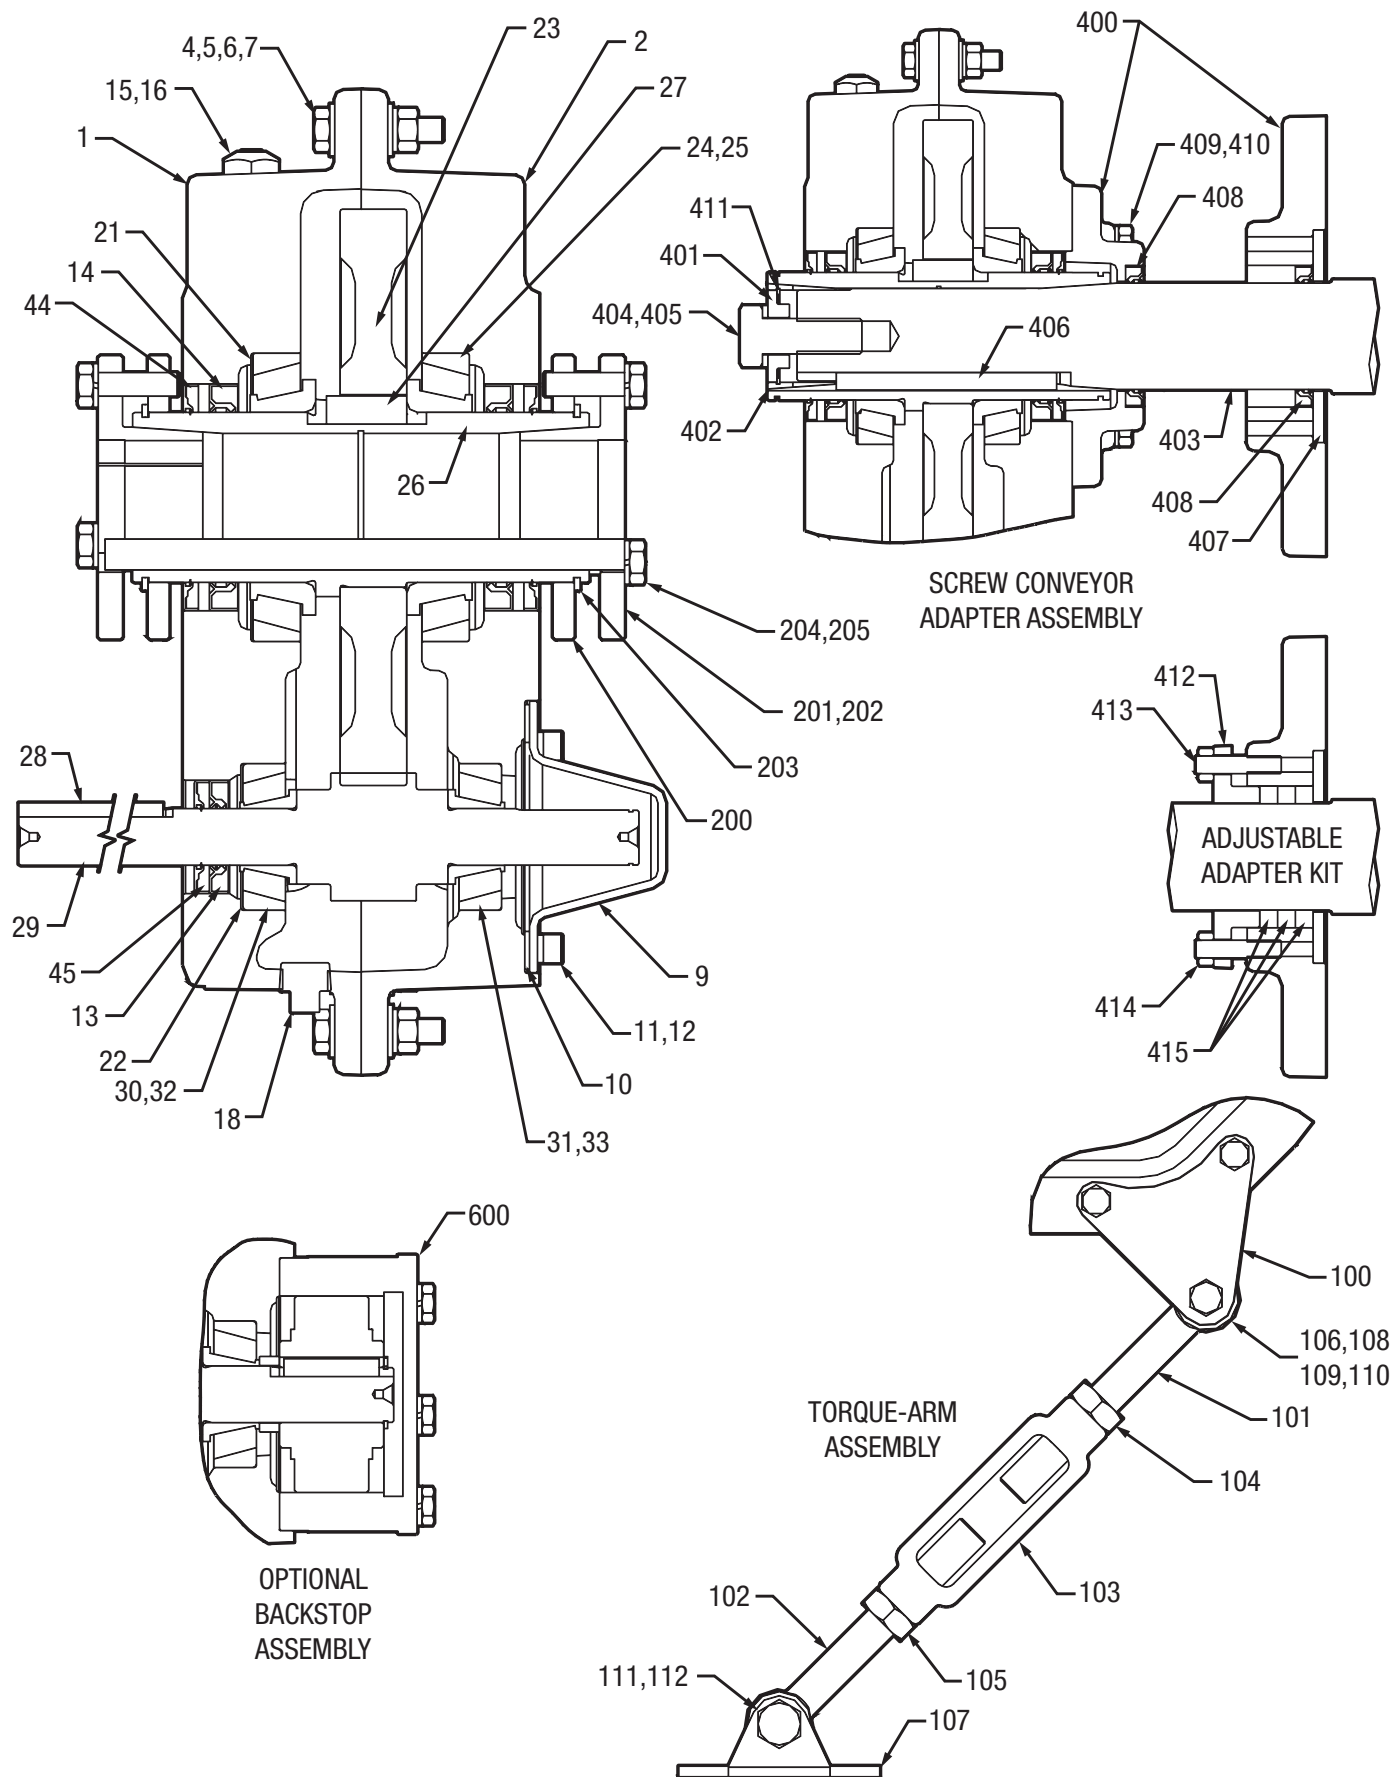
Parts for TA0107L through TA7315H Taper Bushed Single Reduction Reducers
